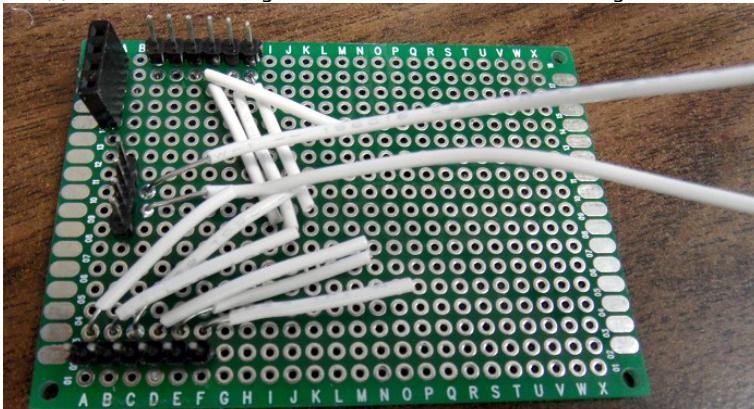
Perforated board (Bottom View – Zigbee Shield Side)
